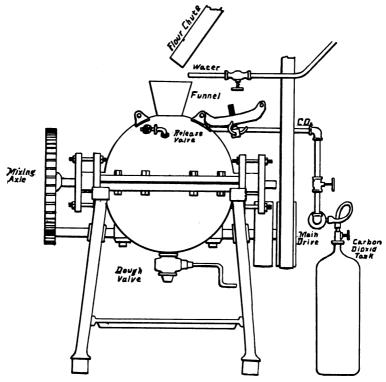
Aerated bread machine. (Courtesy Meek-Barnes Baking Co., Los Angeles.)
